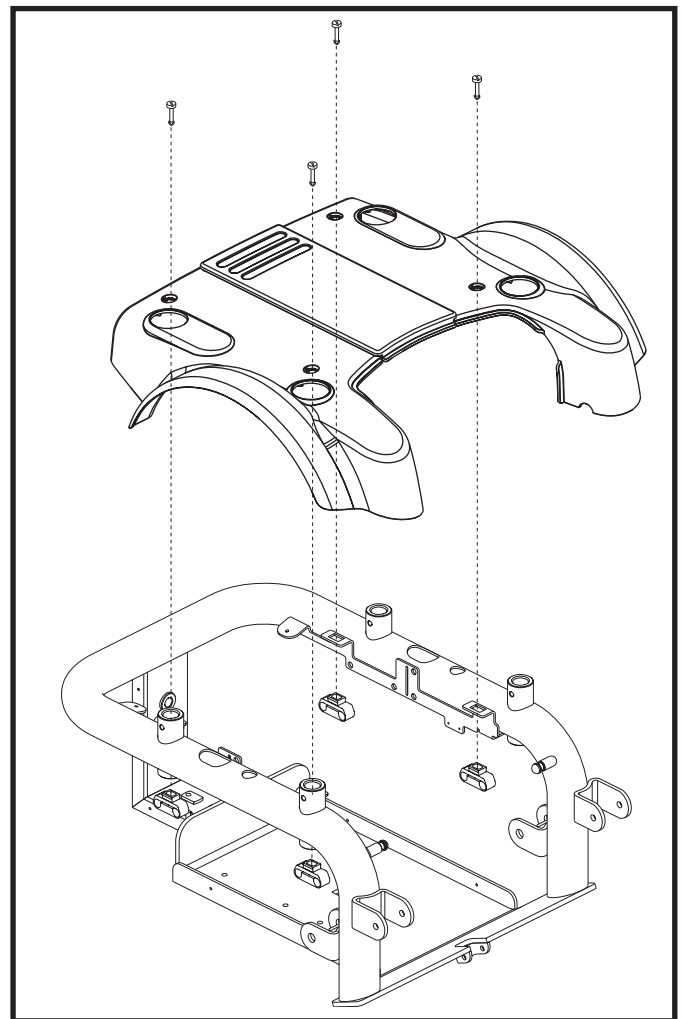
Jazzy 1121 Shroud Assembly/Disassembly
